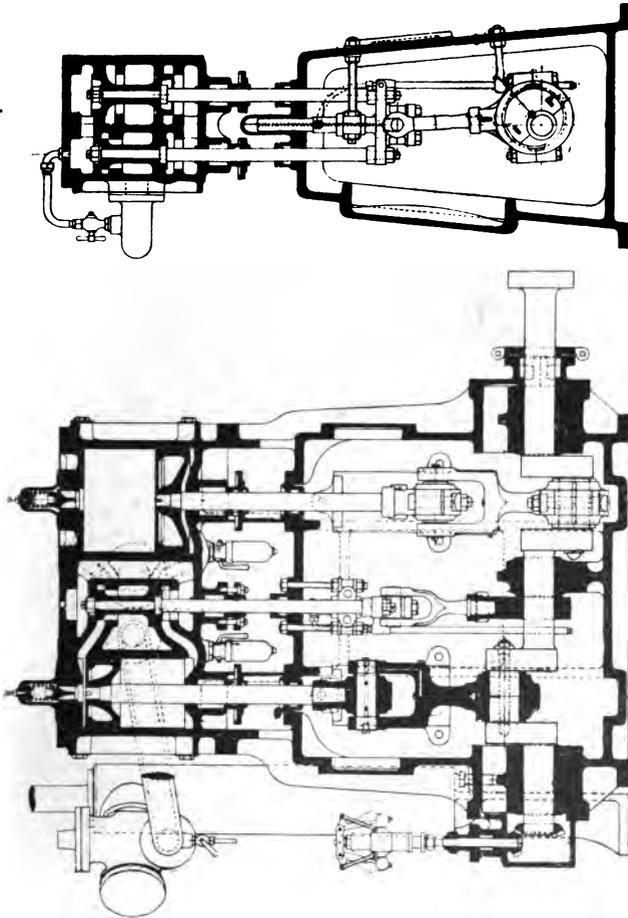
SECTIONAL VIEWS OF MESSRS. DAVID CARLAW & SONS' HIGH SPEED ENGINE.
